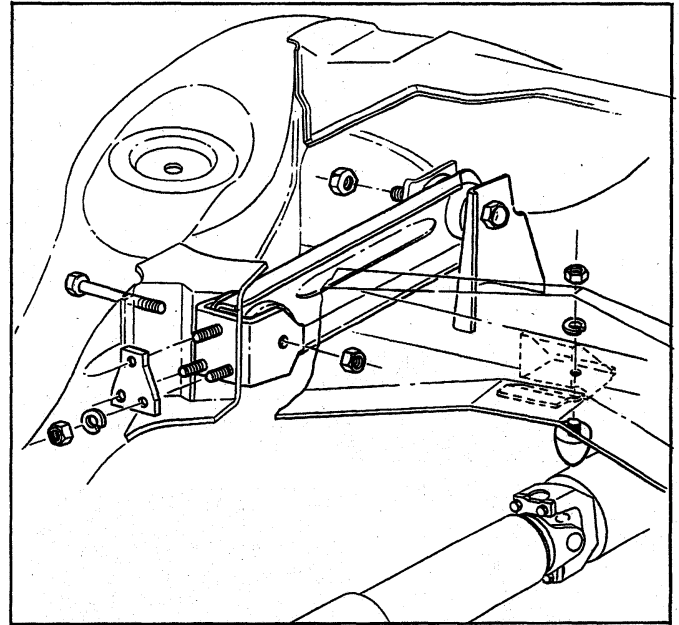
Rear Suspension Upper Control Arm Attaching Points (Chevrolet)
